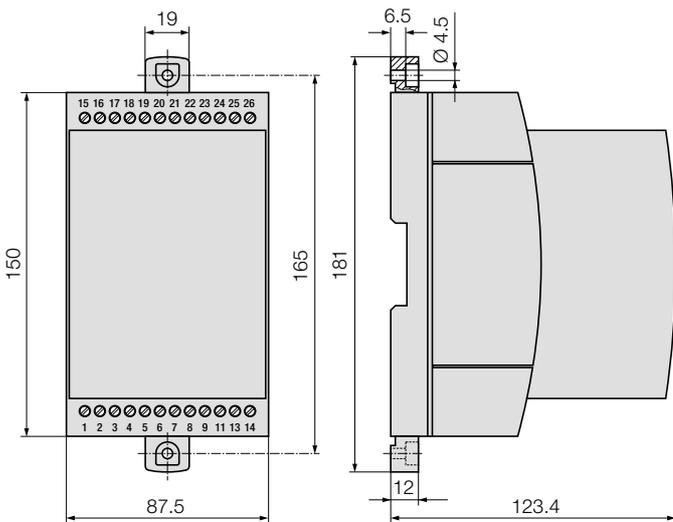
SINEAX DME 400 in housing T24, screw hole mounting brackets pulled out.
